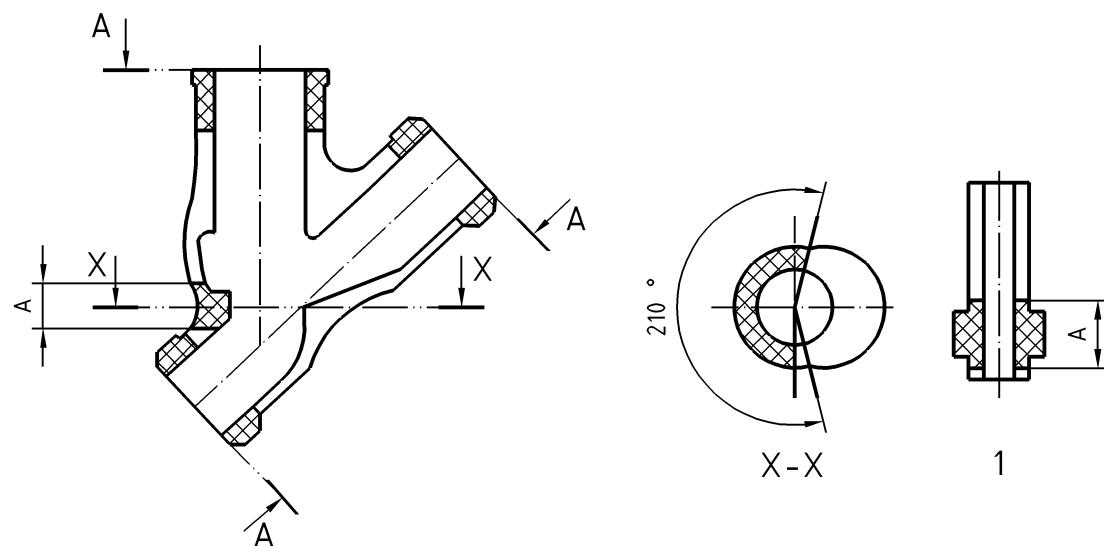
Typical casting section showing required radiographic examination of Y pattern globe valve body and bonnet (pressure seal bonnet)
